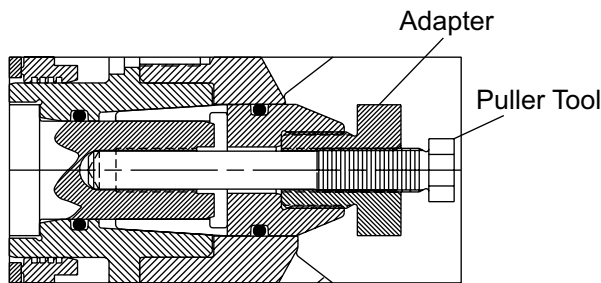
IMPELLER MOUNTING (IMPELLER SIZES 36 AND 41)
